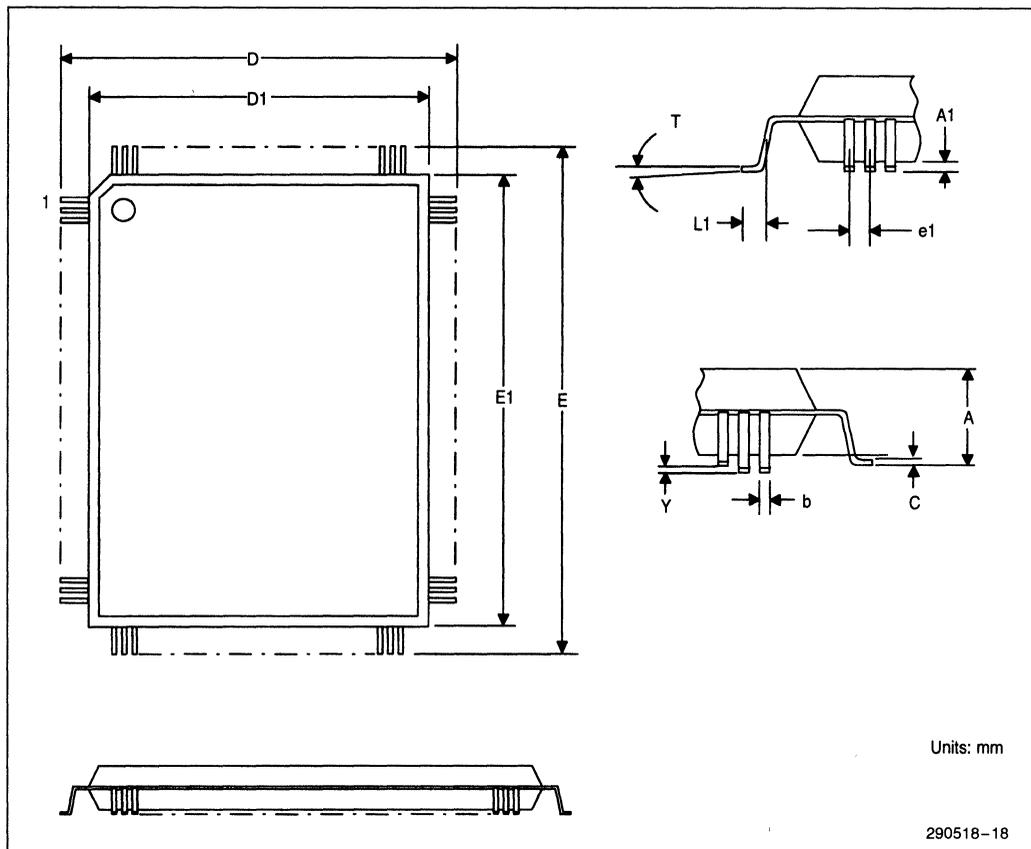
100 Pin Plastic Quad Flat Pack (PQFP) Dimensions
